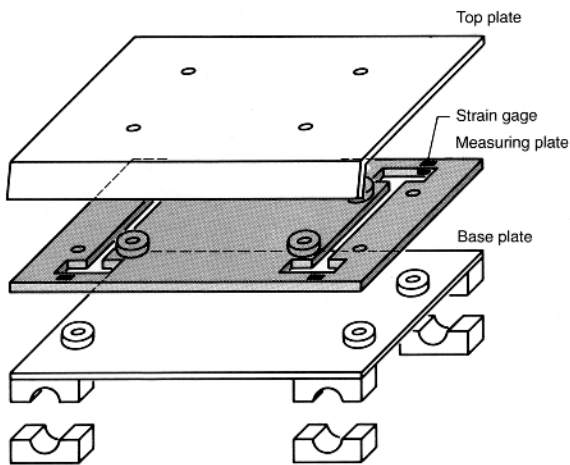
Measurement platform: Baseplate mounts to starting block, measuring plate is equipped with strain gages, top plate transfers forces to measuring plate
